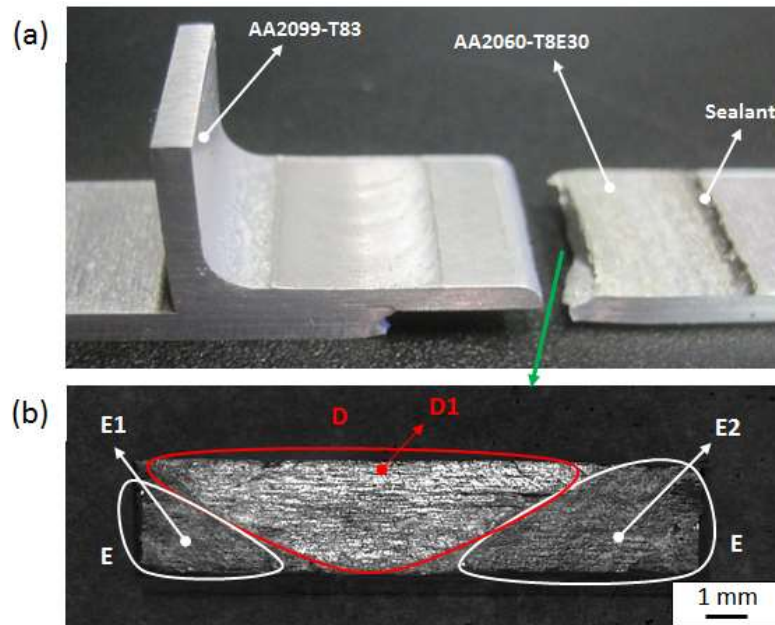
Fracture surface analysis of specimen C05_B (indicated in Figure 76) showing the fracture in the HAZ of the FSLW joint; (a) general view of fractured specimen; and (b) perpendicular view of the fracture surface.
